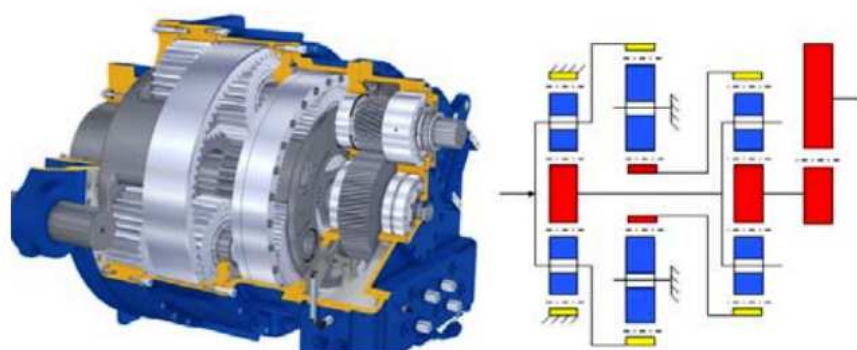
Differential gearbox, Bosch Rexroth, working principle
